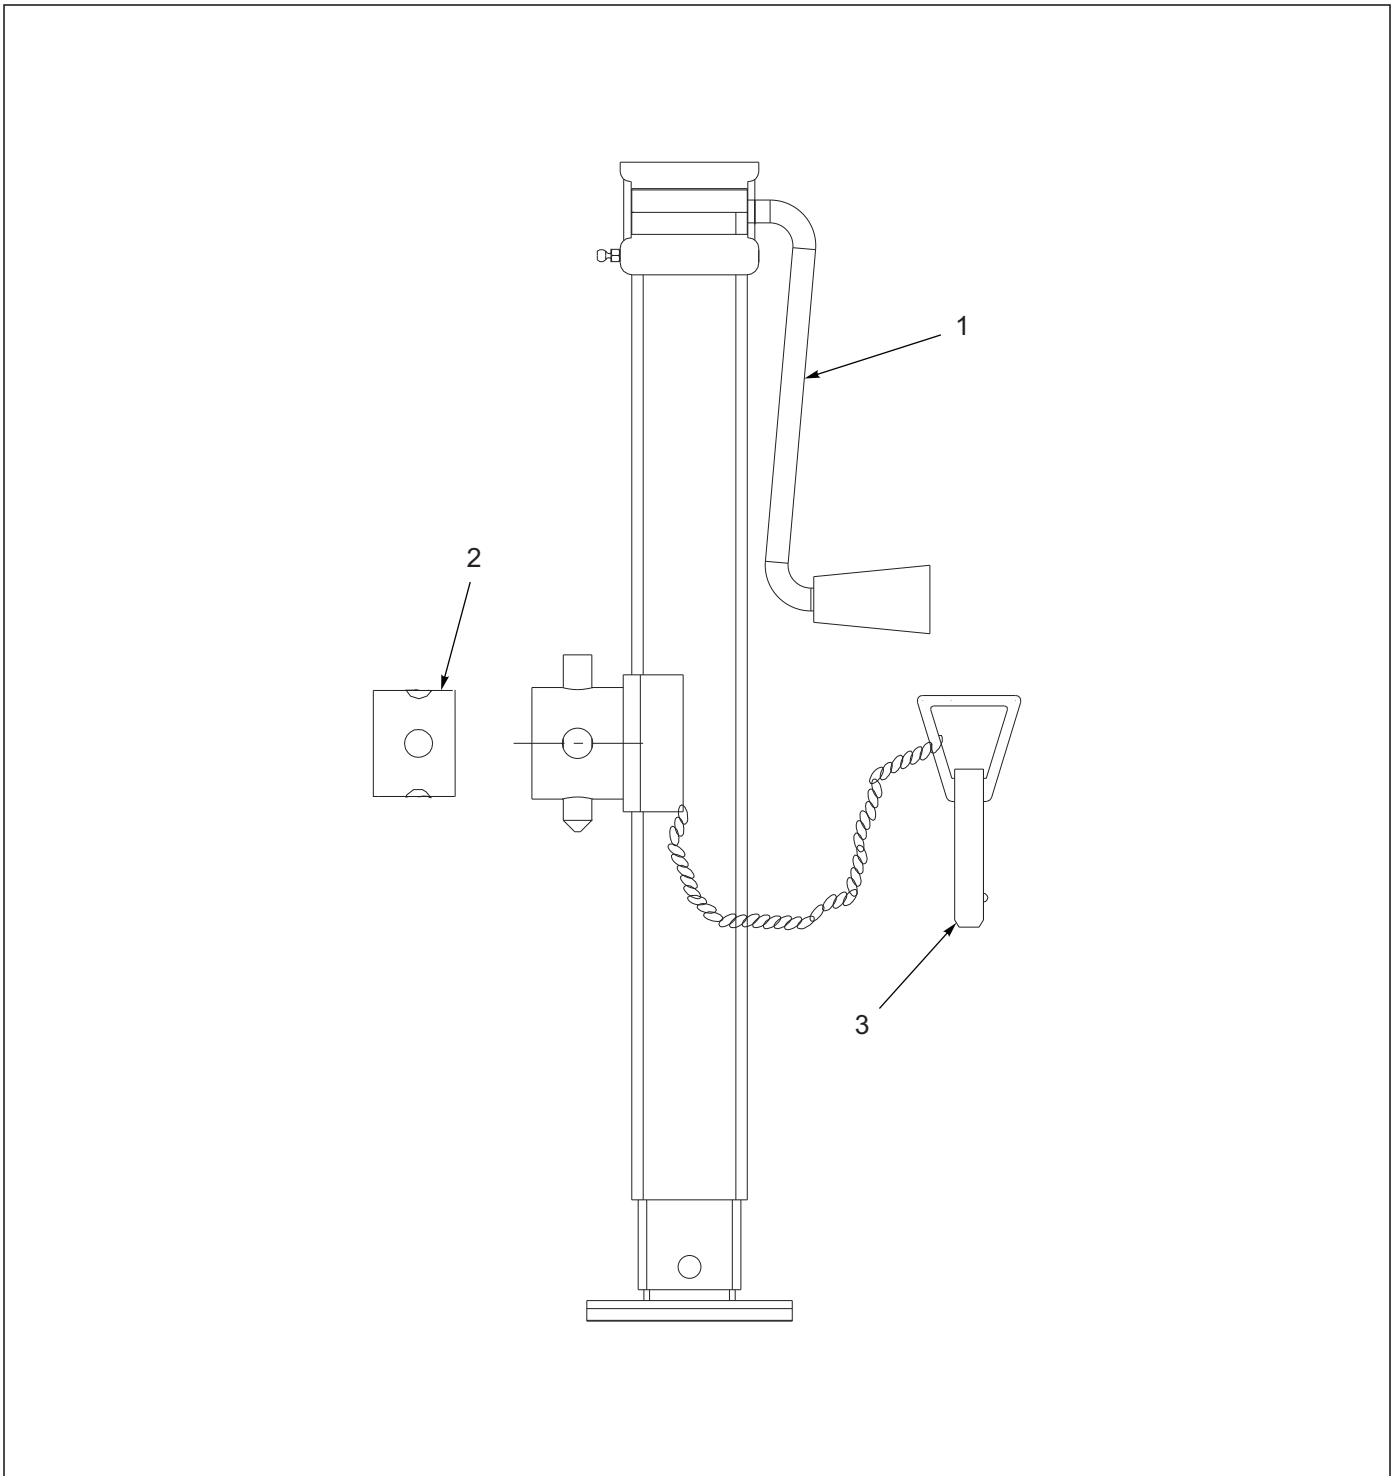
7,000 Lb. Sidewind Jack Assembly
